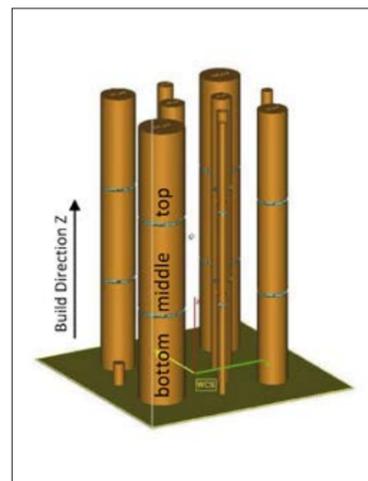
Arrangement of specimens in build platform from Arcam A2 machine [1]
